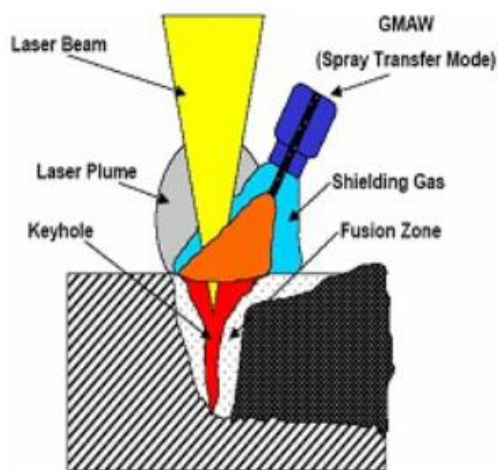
Hybrid laser arc welding (Abbott et al., 2007).
